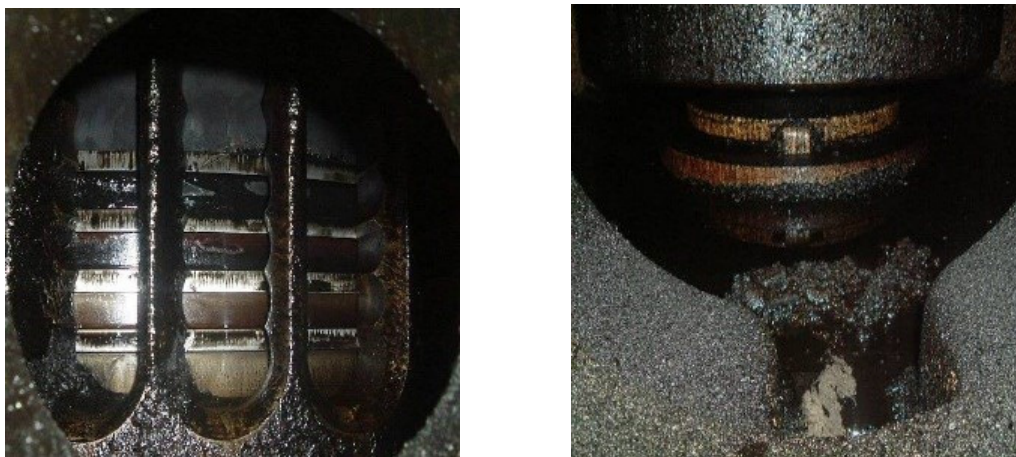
The piston rings and the bottom of scavenging box when using mechanical lubricator
